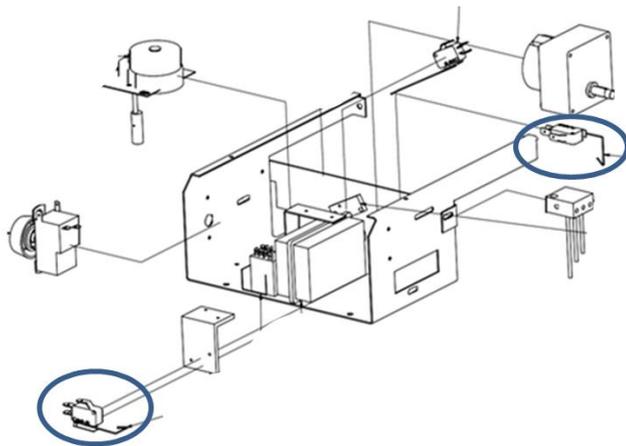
Section of the exploded view of the upper part of the ice maker
